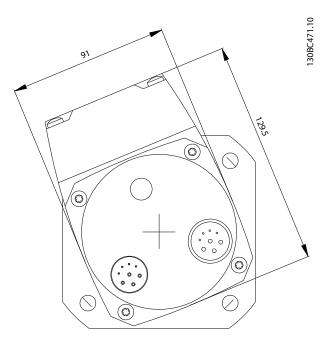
Rear View: Servomotor with IEC Flange and Brake
